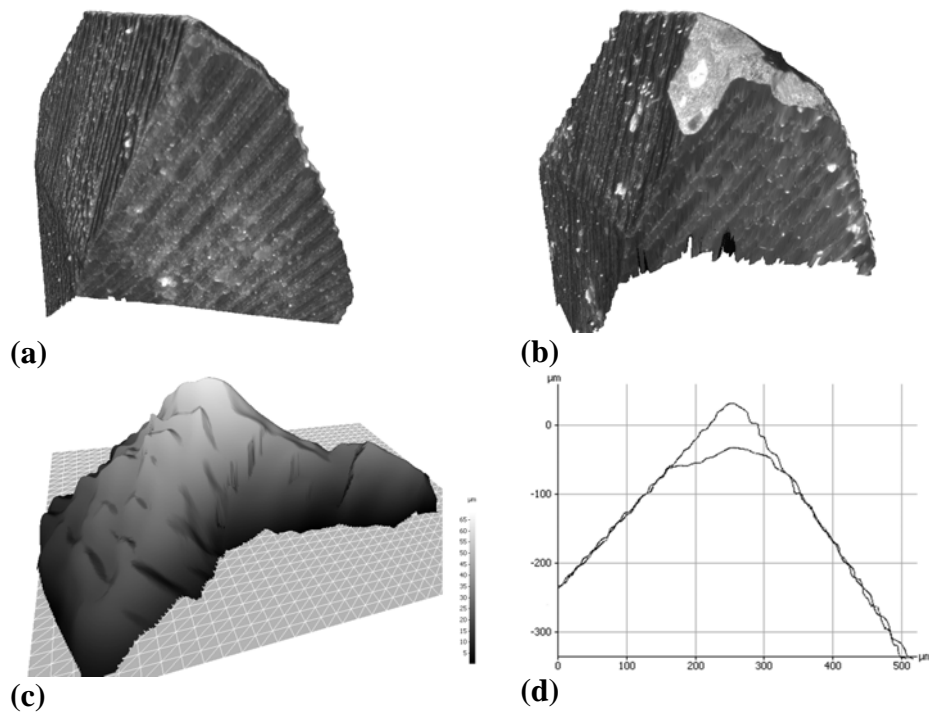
(a) Unused cutting edge (b) Used cutting edge (c) Difference volume of used and unused cutting edge (d) Profiles of used and unused cutting edge
